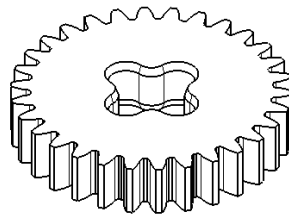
Pinion wheel with backlash free mounting interface according to own design
